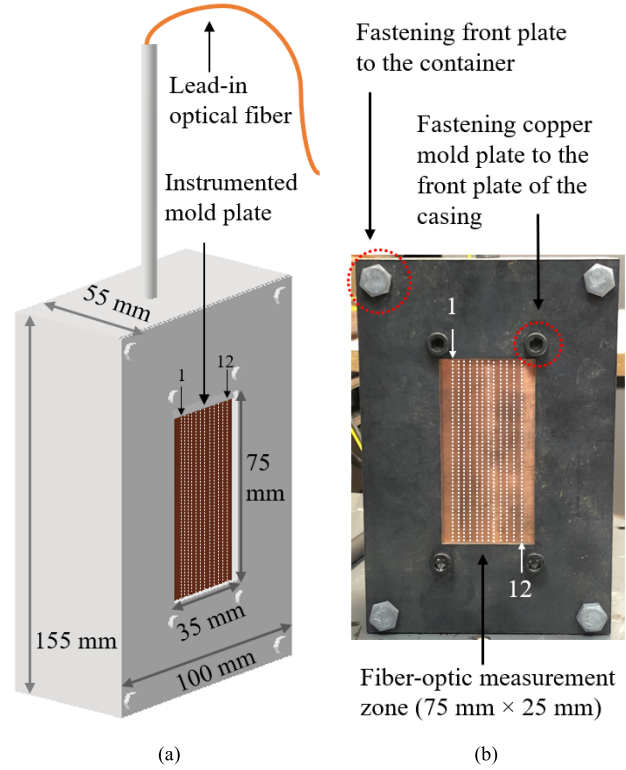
Schematic and photograph of the instrumented copper mold plate housed in a metal casing (a.k.a. the test paddle). (a) Schematic of the mold plate housed in a metal casing. The instrumented mold plate was attached to the front metal plate of the casing. The front plate was then fixed to the casing. The casing protected the back face of the mold plate and fiber loops from direct exposure to the molten metal during the dip test. Twelve white dotted lines represent the 12 embedded fiber sections. (b) Photograph of the front face of the metal casing mounted to the instrumented copper mold plate.
